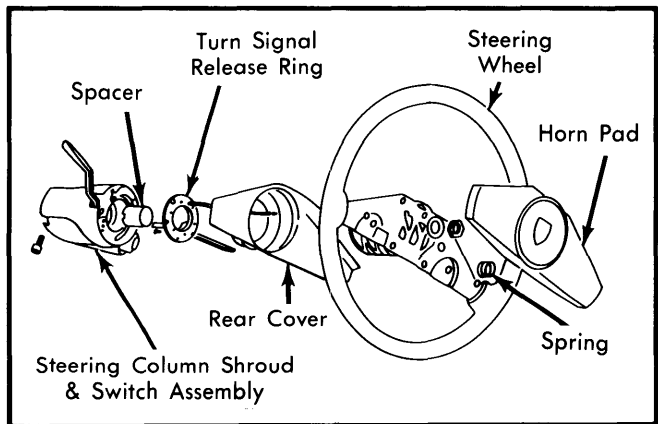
Exploded View of Porsche 924 Steering Wheel and Related Components
